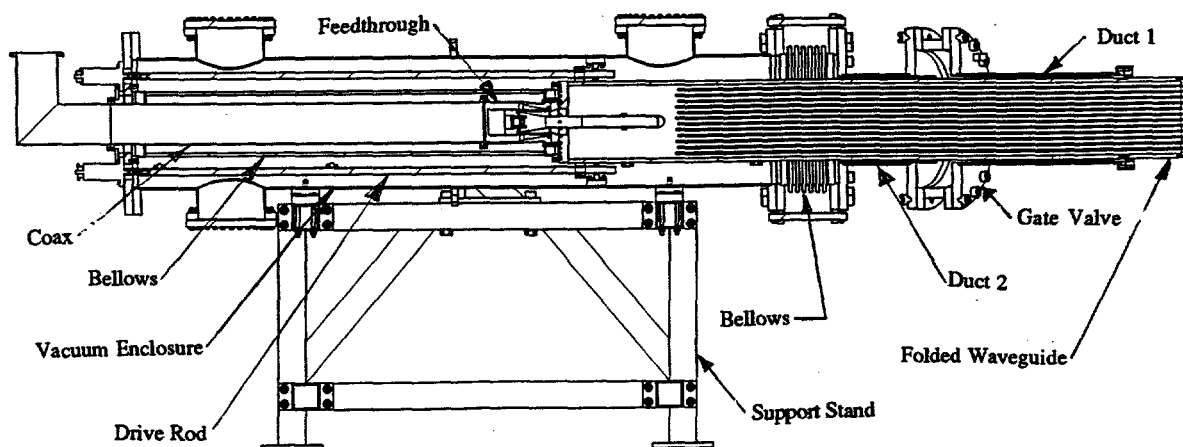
Elevation view of the folded waveguide installed on PBX-M
